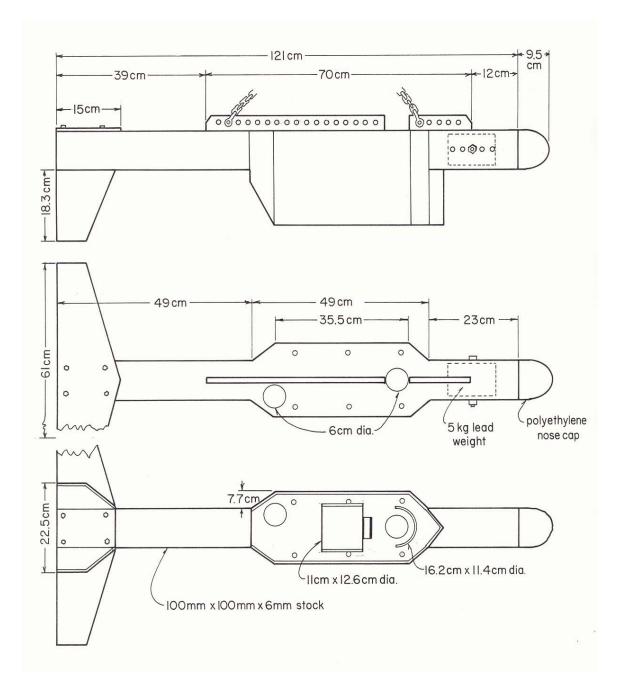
Schematic of the multiple-instrument towed body showing dimensions for construction. The top figure is a side view showing the adjustable cable points. The middle figure is a top view with cable access holes and location of the lead weights encased in the front section visible. The lower figure is the bottom view with an attached instrument-mounting bracket visible. Note that the cable attachment bracket has a section removed to allow access for connecting a transducer cable to the transducer.
